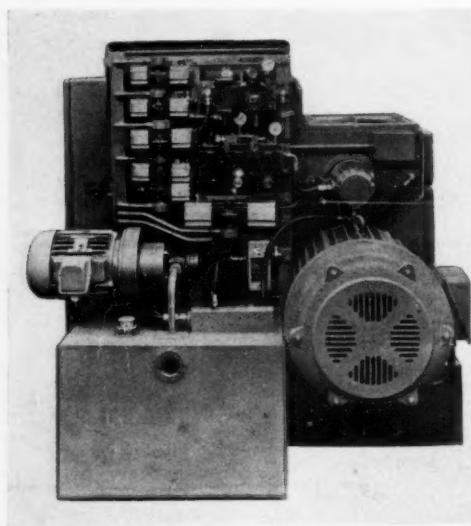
End View Showing the Hydraulic Equipment and the Main Driving Motor on the Churchill Redman PS Lathe
